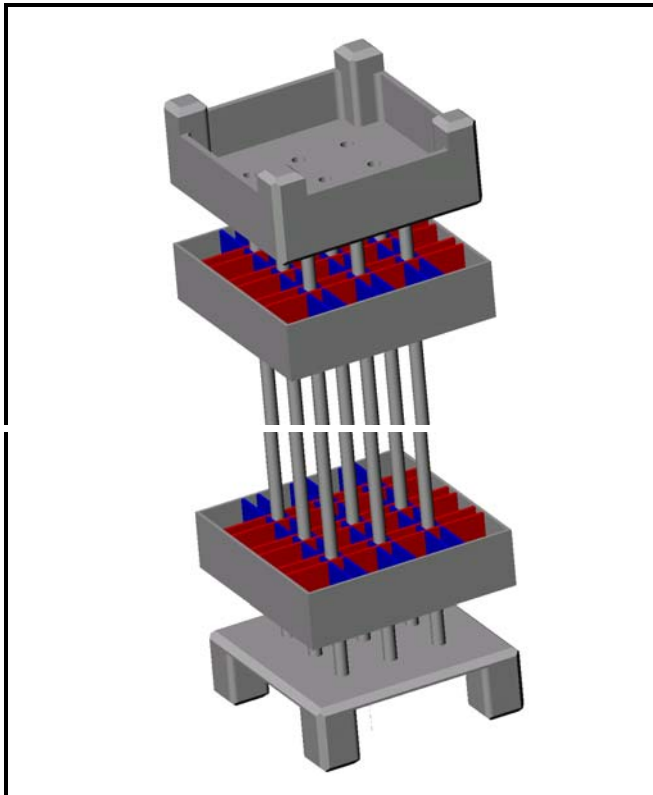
Dummy Fuel Assembly (Fuel Rods Removed for Clarity)
